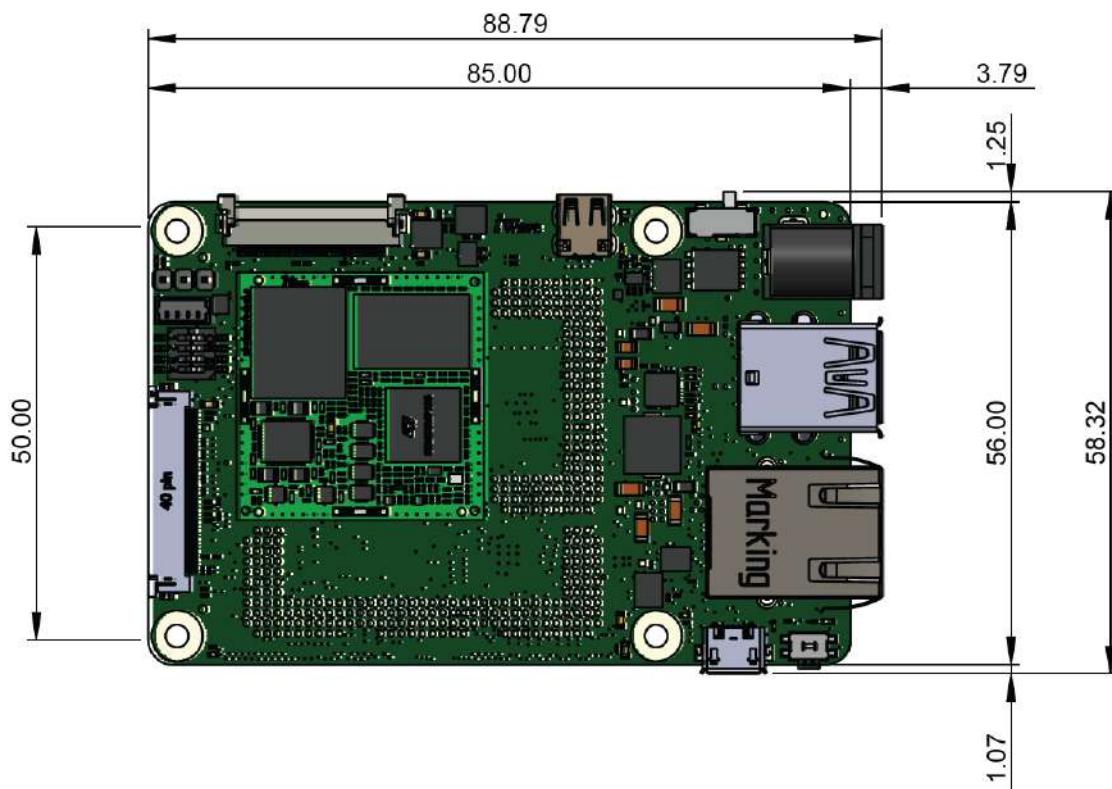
Mechanical Dimensions of STM32MP135 SBC Top View
